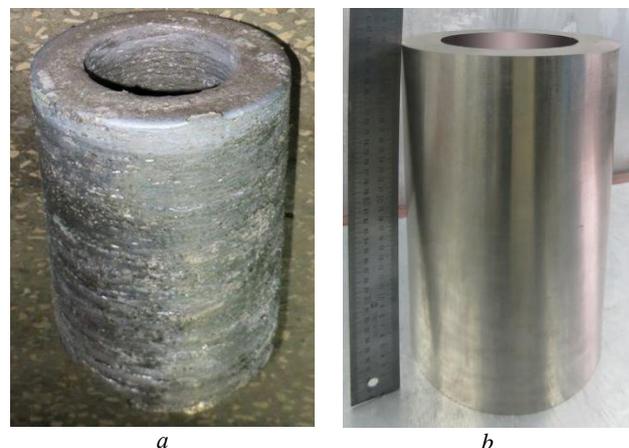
General view of the tube billet produced by electron-beam remelting (a) and those after machining (b)
